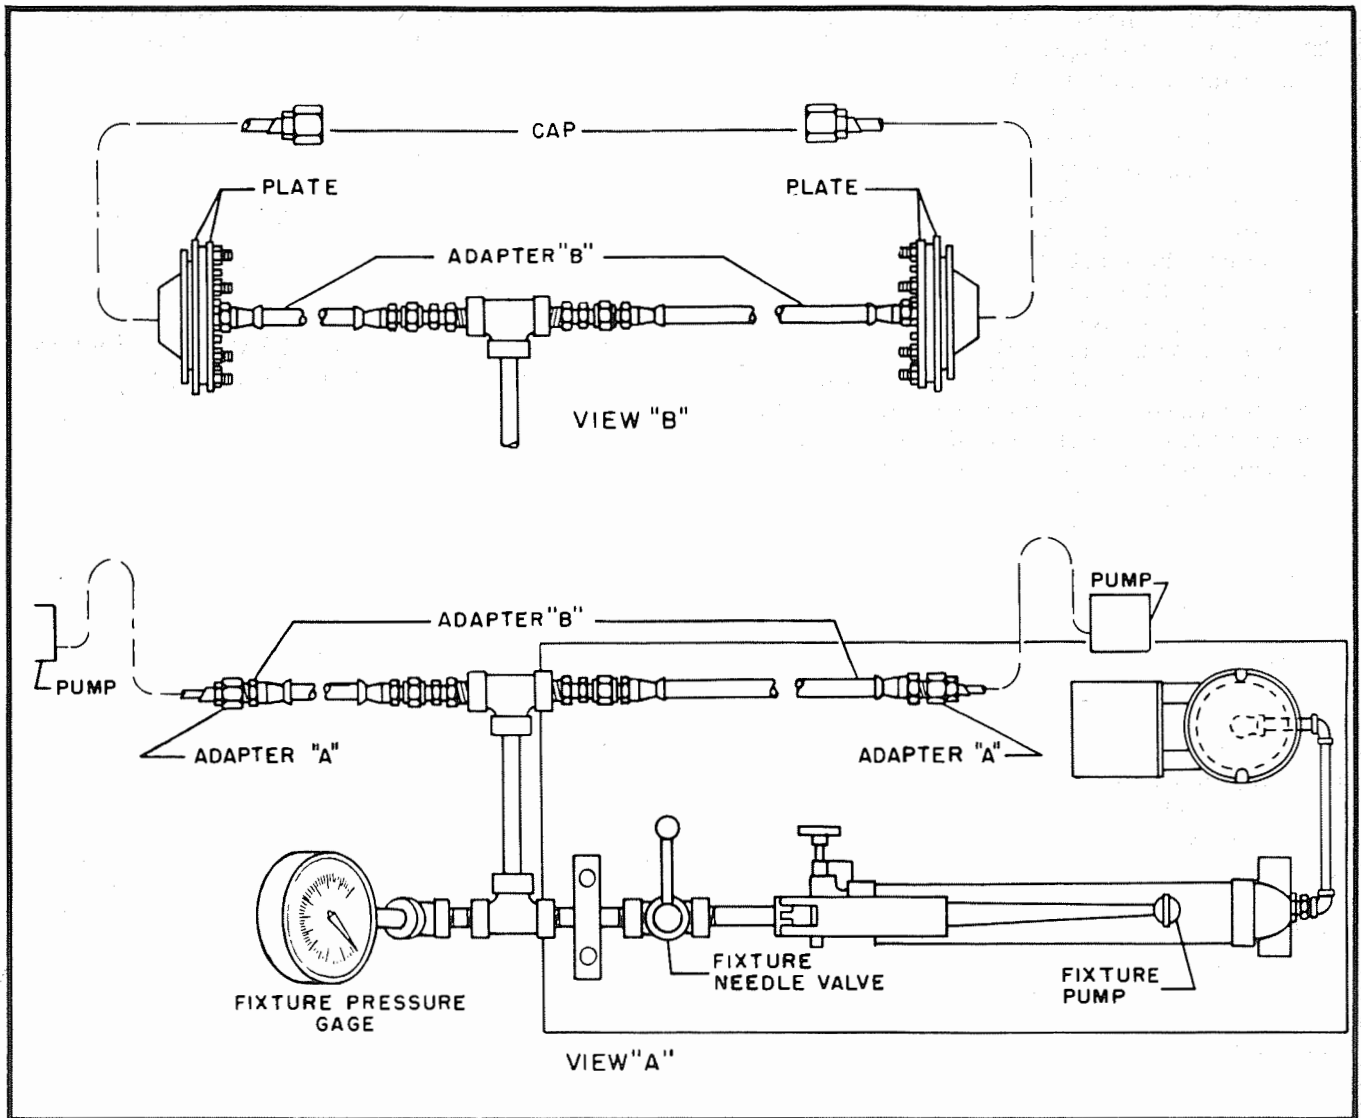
Fuel Injection Lines Pressure Leakage Test Equipment
